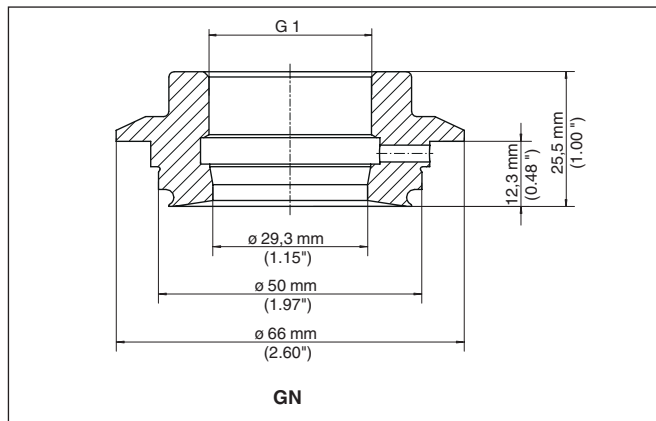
Dimensions of threaded adapter G1 (DIN 3852-X) on Varivent Form F 25
